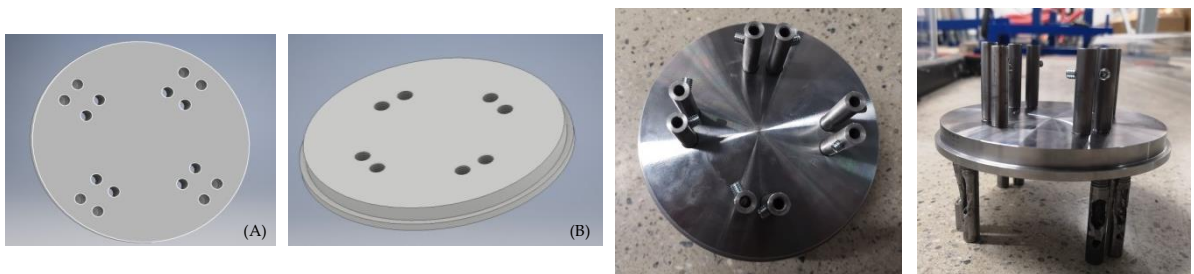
Modified bottom-plate, bottom view (A) – top view (B)
